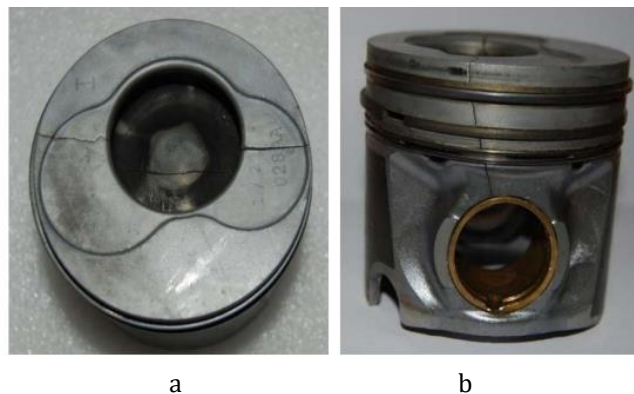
A crack on the piston pin: a) cracked piston head; b) cracked piston skirt [8]
